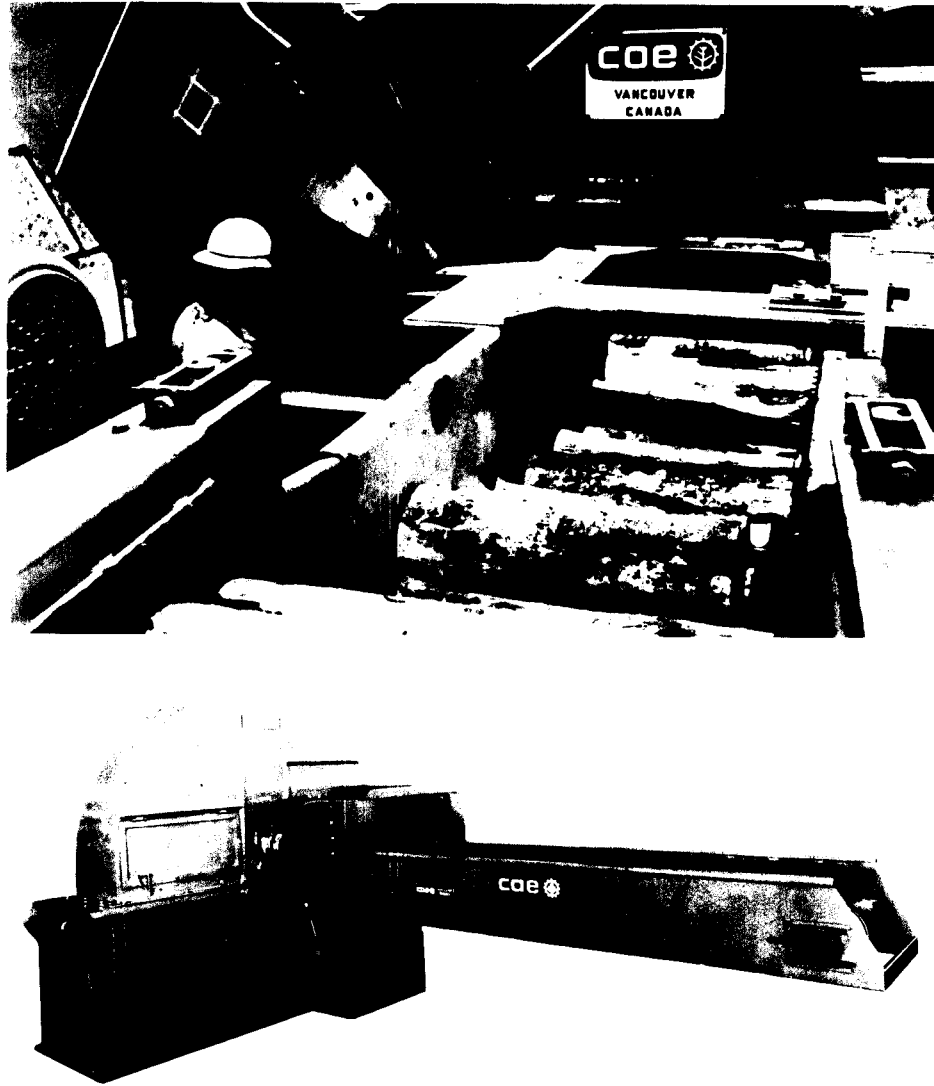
Disk flaker measuring 93 inches in diameter. (Top) Hopper removed to show disposition of castellated knives mounted in the disk; flake length is determined by the length of each cutting edge. (Bottom) Feed arrangement for 26-inch-long hardwood bolts. (Photo from CAE Machinery Ltd.)
